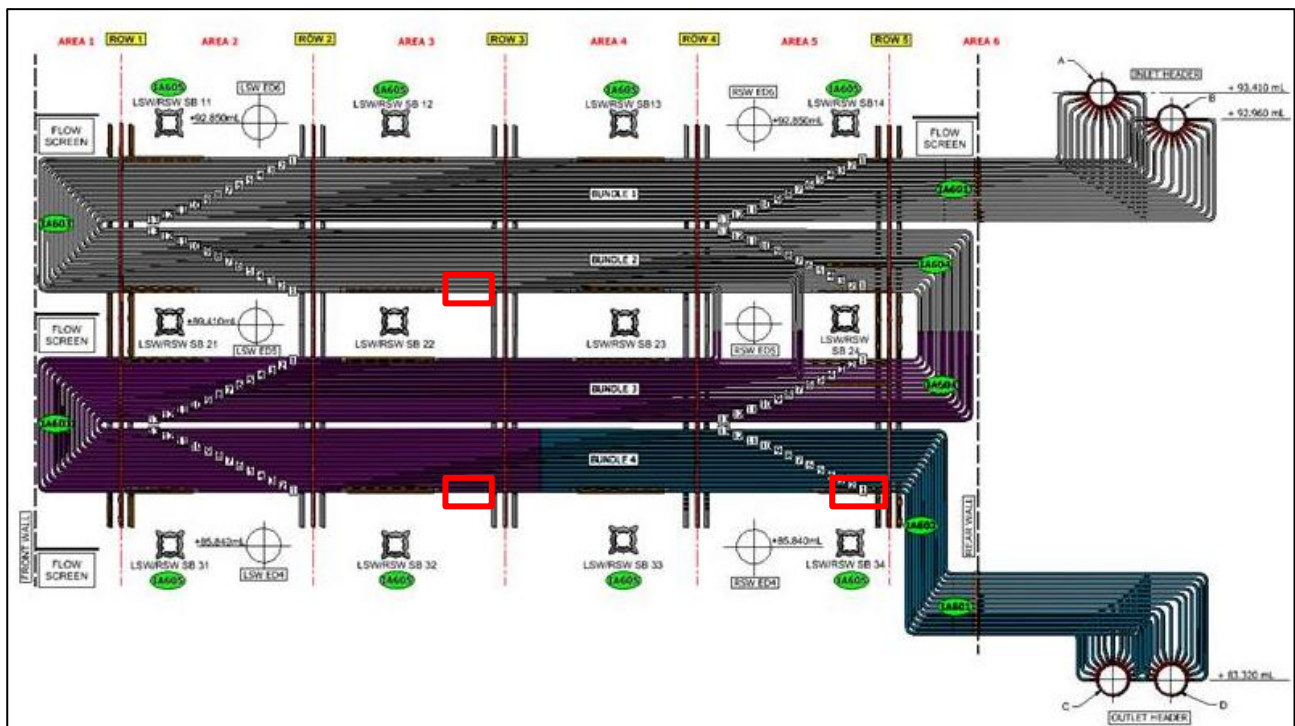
Schematic drawing of RH1 showing where Tube-SOLO inspected should be conducted.
